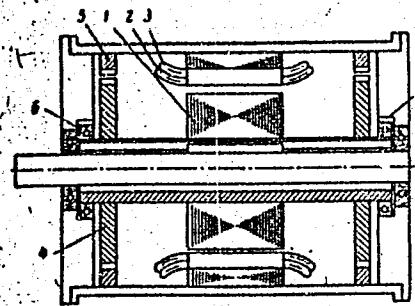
1--rotor; 2 and 3--three-phase windings on the stator; 4--wheels; 5--bearing rings; 6--roller bearing; 7--socket
